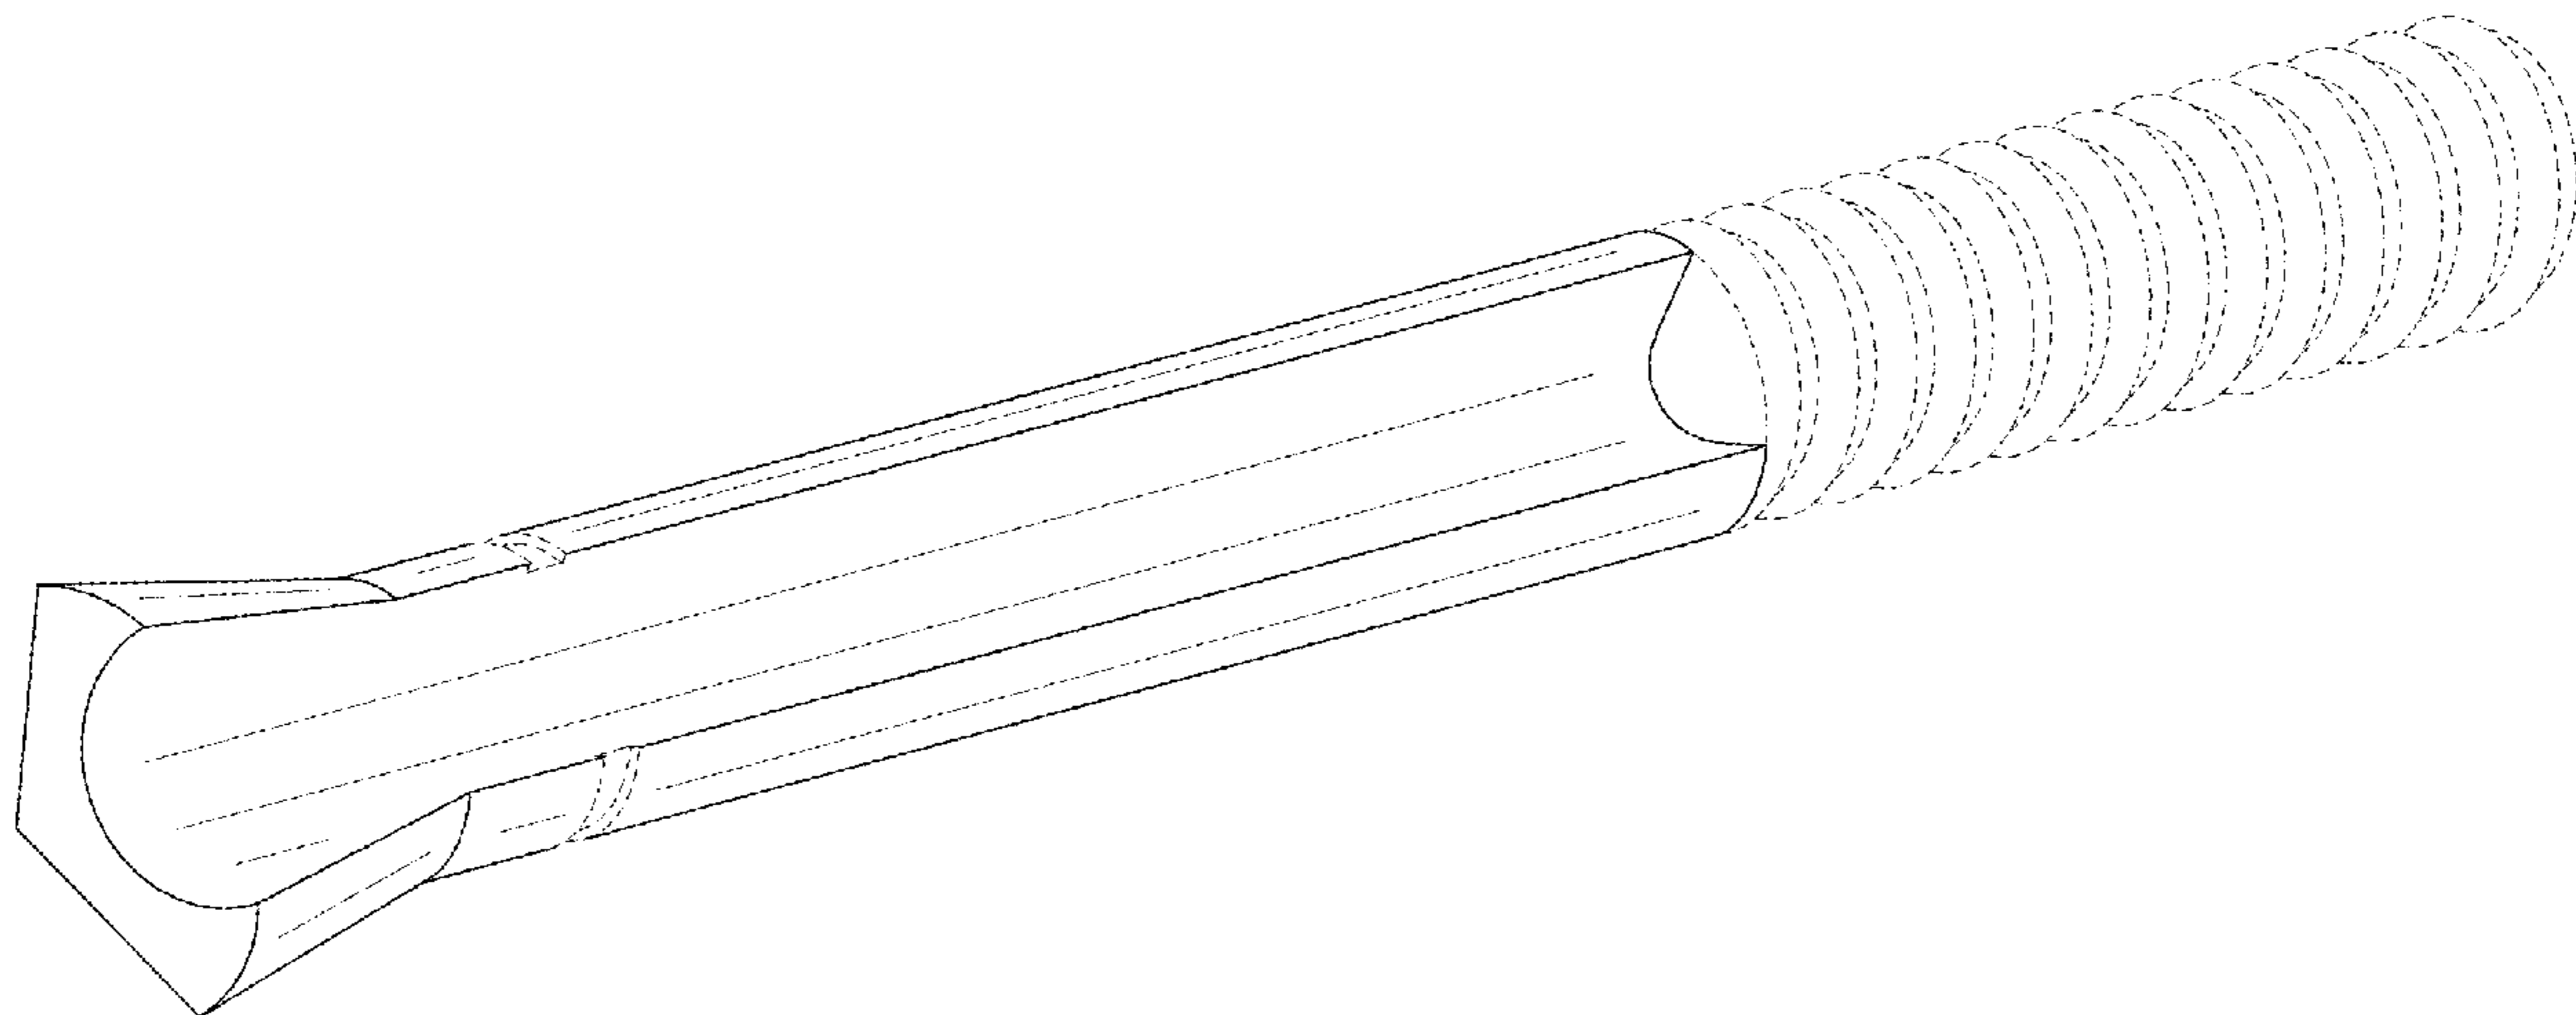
is a first side view of the anchor assembly drill bit of FIG. 1, the second opposite side view being a mirror image thereof.
